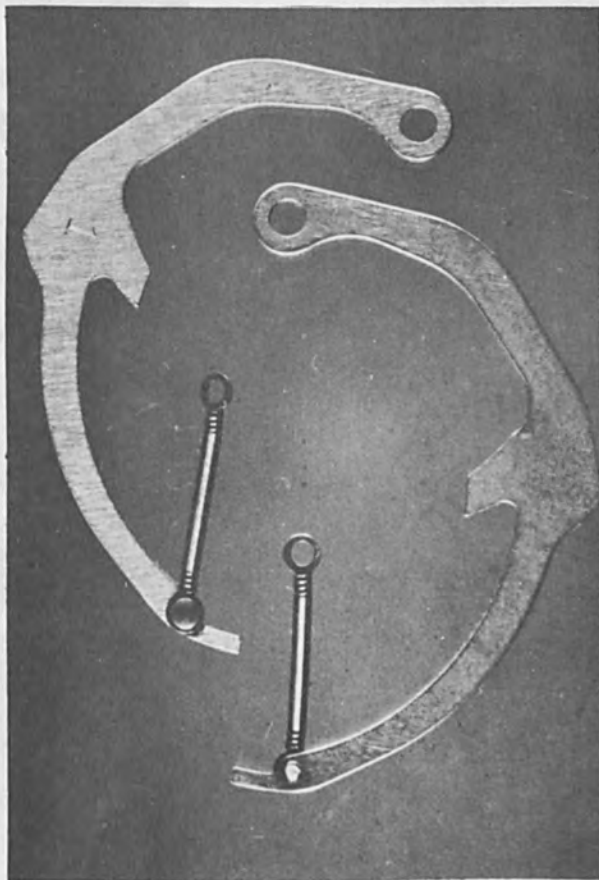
Latch assembly in which EB welder is used to attach rivet, allowing the spring to rotate freely.
